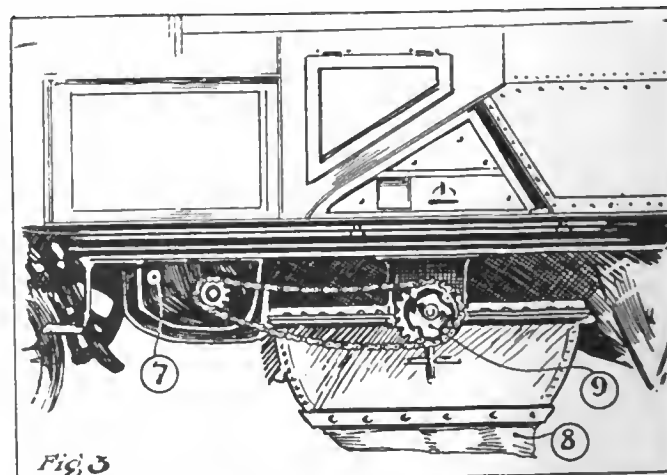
Left side view, front portion. 7—End of motor shaft, with starting clutch. 8—Leather flaps reaching to the ground to confine sweepings. 9—Chain for driving the brush; casing removed; to adjust brush diameter for wear, long-handed spanner is applied in 4 holes in rear sprocket to turn shaft
